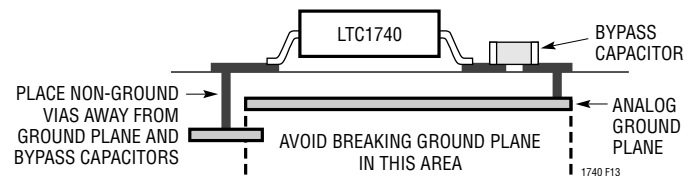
Cross Section of the LTC1740 Printed Circuit Board
